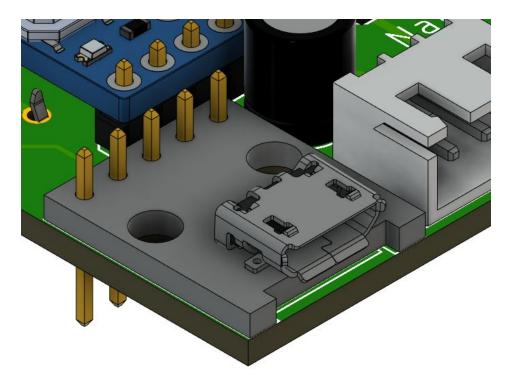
Angled bottom view of VU Stick V1.2 PCB with micro USB module and pins.
